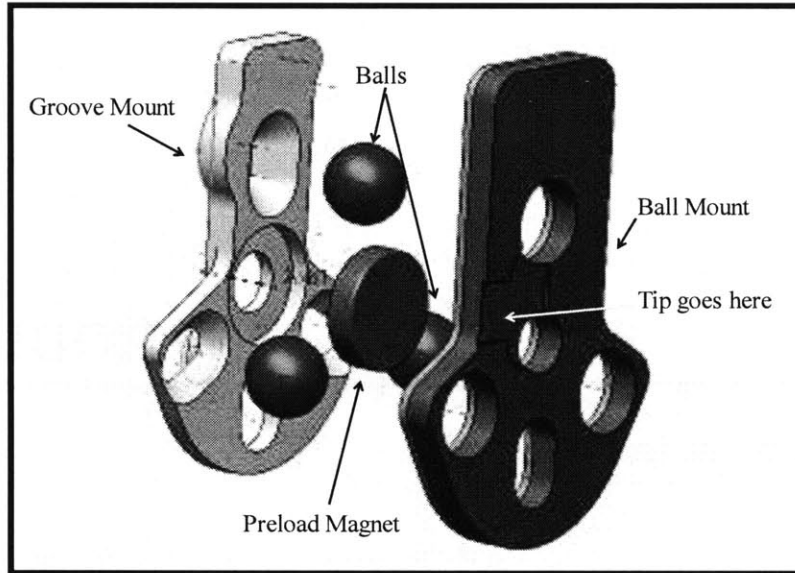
Accurate and repeatable kinematic fixture CAD model exploded view
